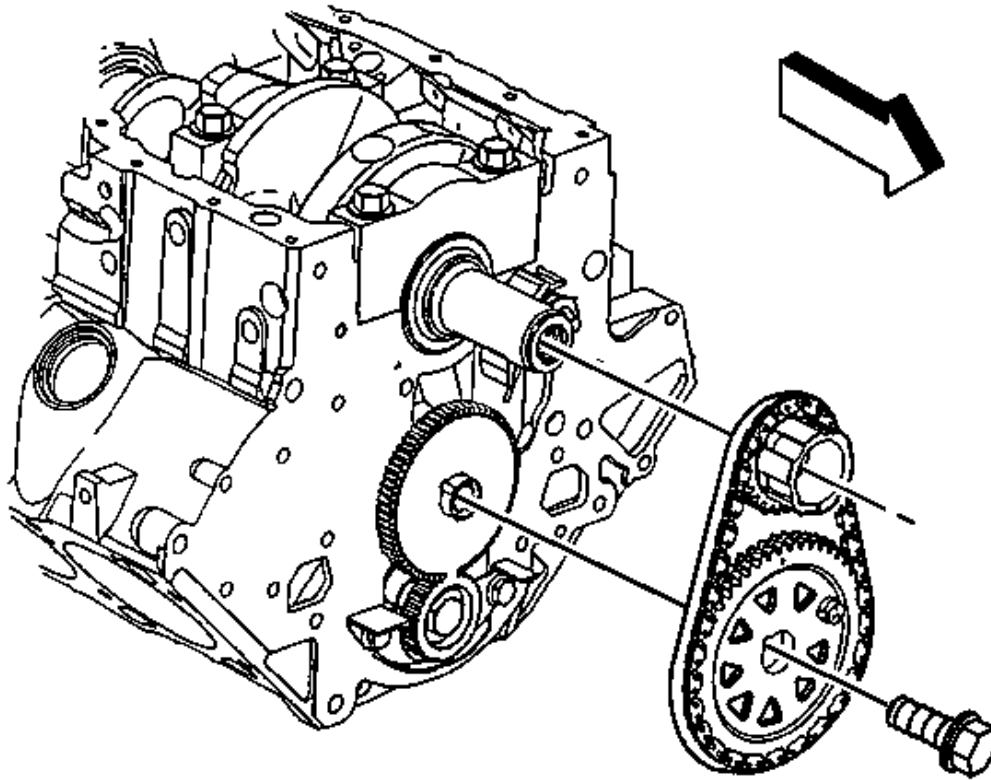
Removing Timing Chain & Camshaft Sprocket (L67)
